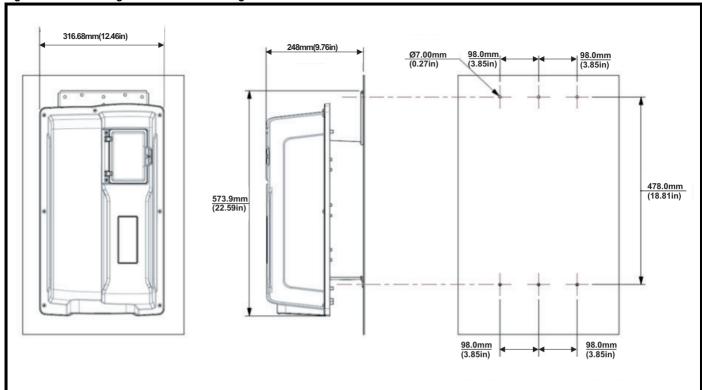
Size 5 High IP Drive and Mounting Hole Dimensions
